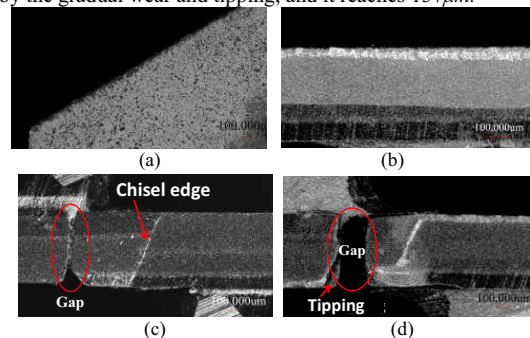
Worn PCD drill. (a) rake face of lip edge; (b) flank face of lip edge; (c) chisel edge before drilling (d) chisel edge after drilling
